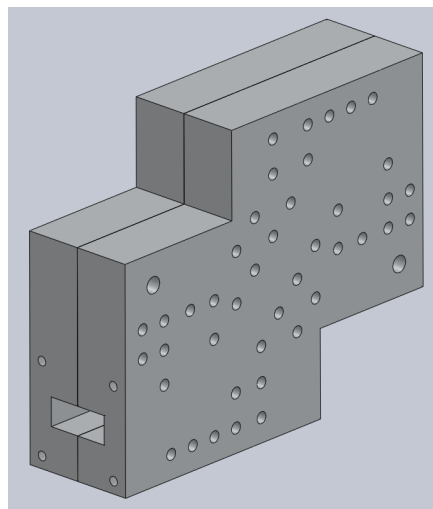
3D manufacturing plans of the E-plane folded hybrid SIR filter.
